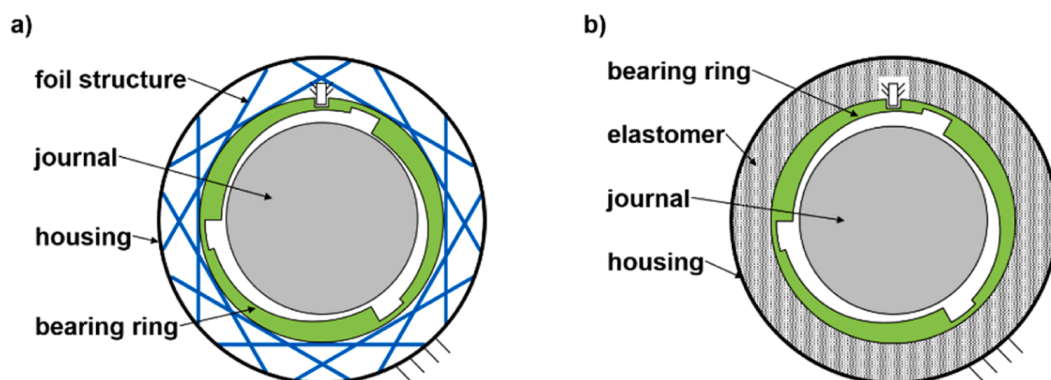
Design variants of air ring bearings: (a) ring mounted with a foil structure and (b) ring mounted with an elastomer (visco-elastic mounting).
